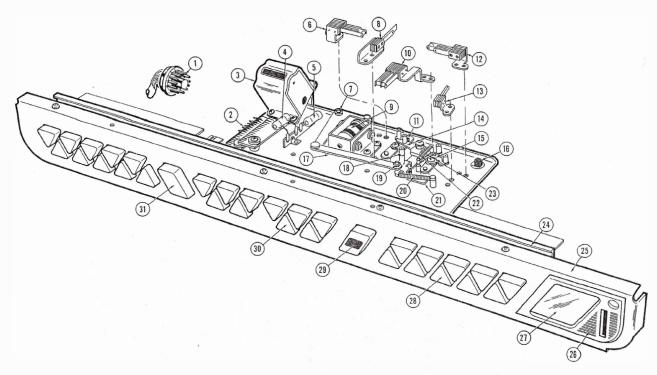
SELECTOR SWITCH ASSEMBLY, 2400-2400S
